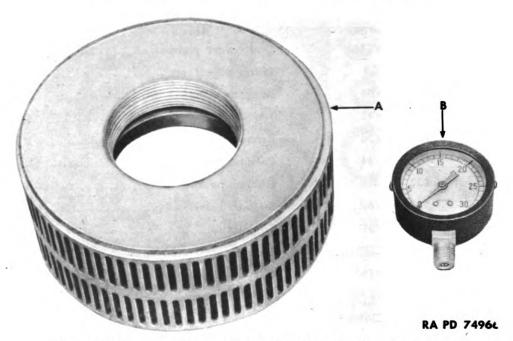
Centrifugal Pump Suction Strainer and Gage
